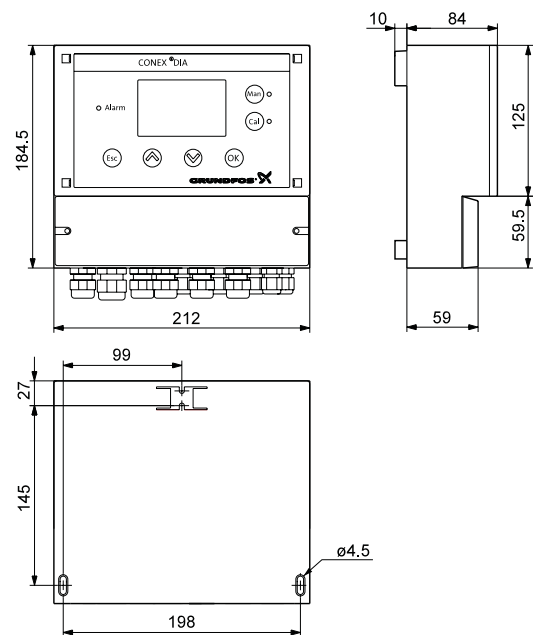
Dimensions, Conex® DIA for wall-mounting
